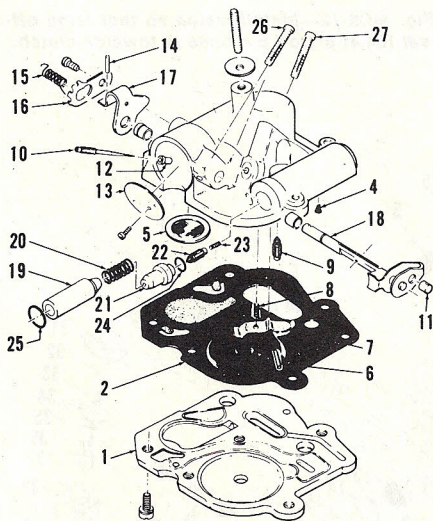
Exploded view of early Model "W" series carburetor. Refer to Fig. MC6-1 for view of carburetor installed.
